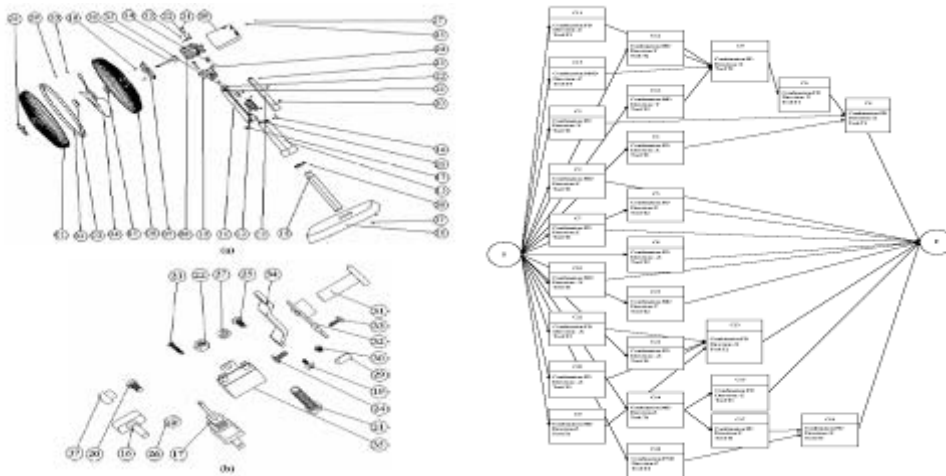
Electric-fan parts: (a) exploded drawing and (b) enlarged scale drawing for small parts in (a). (c) Precedence graph of connectors for electric fan.
